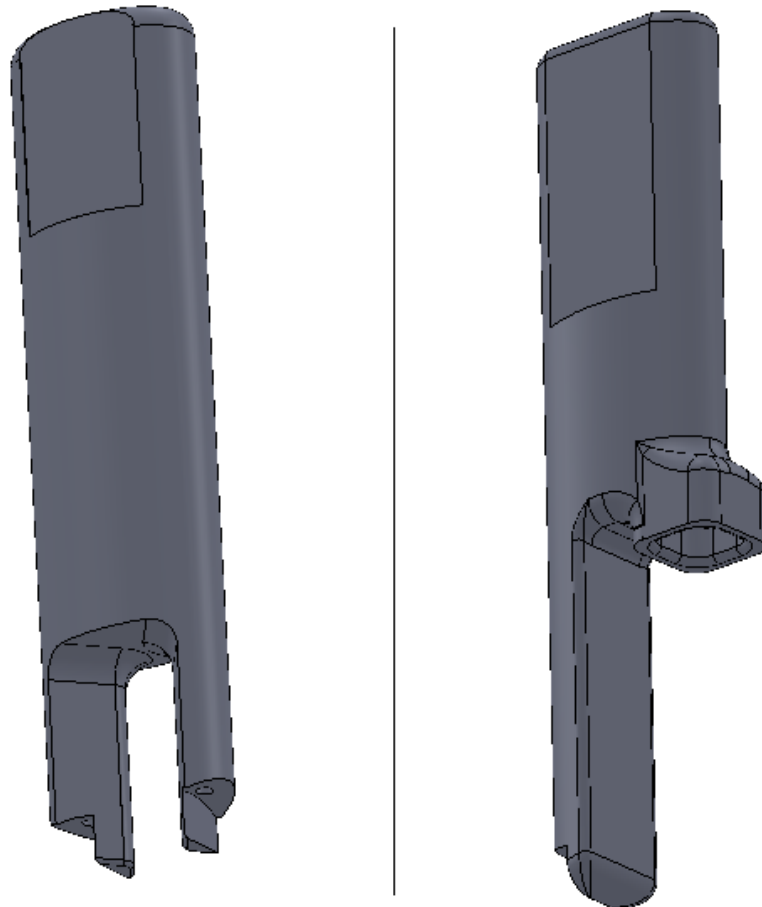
Left, TB2.0's original assembly rod; Right, JTB2.0's modified assembly rod.
